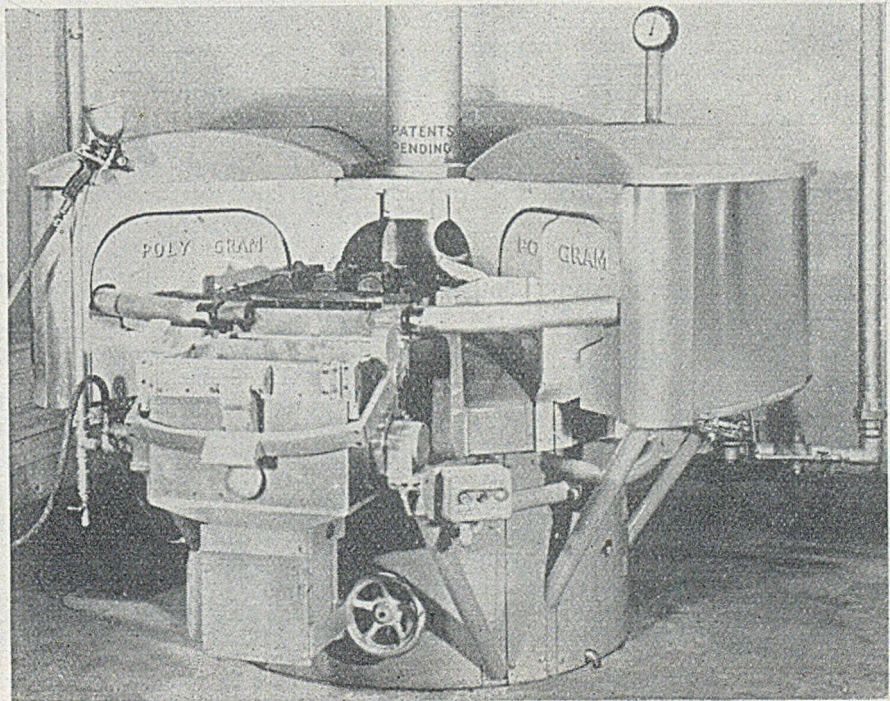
Automatic Shell-moulding Machine, Mark IV, newly developed by the Polygram concern. The machine carries four Patternplates which in turn are brought to the operating position by a rotary indexing motion. During three-quarters of each cycle, the Patternplates with the Sand "Biscuits" adhering are contained in the Curing Oven.
